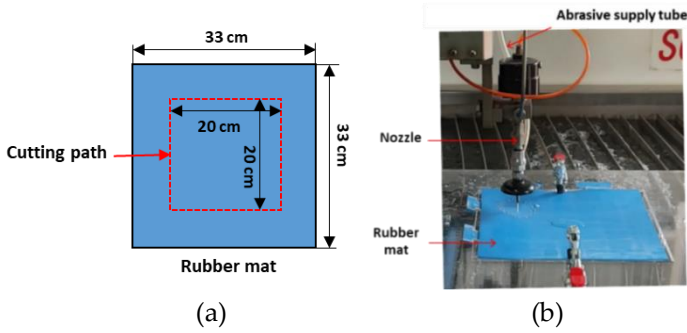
Jigsaw rubber mat: (a) a cutting path and (b) experimental setup of AWJ cutting
